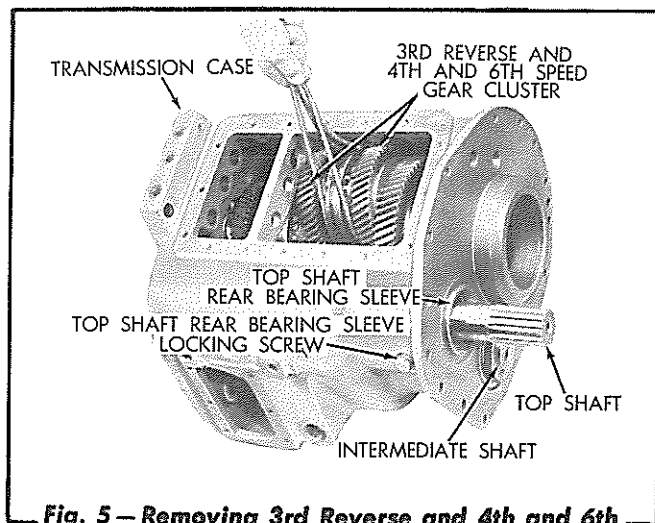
Removing 3rd Reverse and 4th and 6th Speed Gear Cluster
